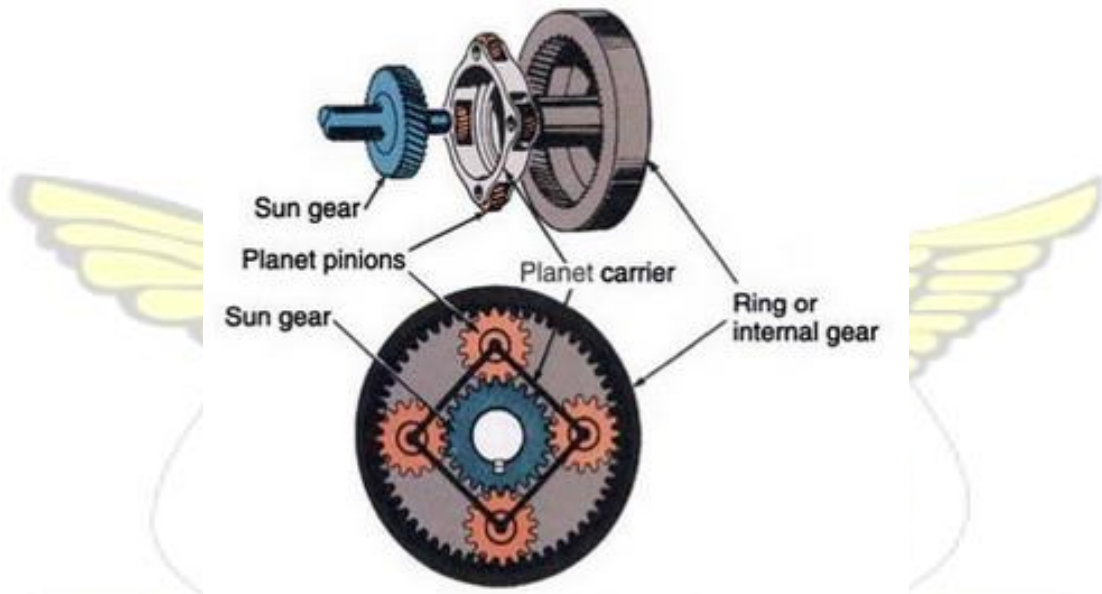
Planetary gear (Courtesy of General Motors Corporation)
